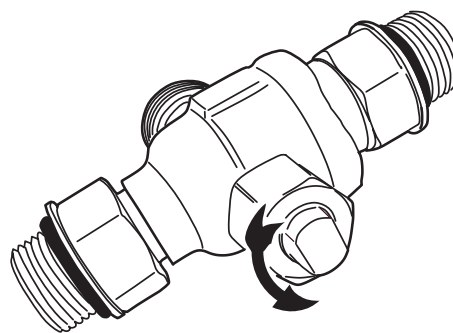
DUAL OIL FILTER ISOLATION VALVE
